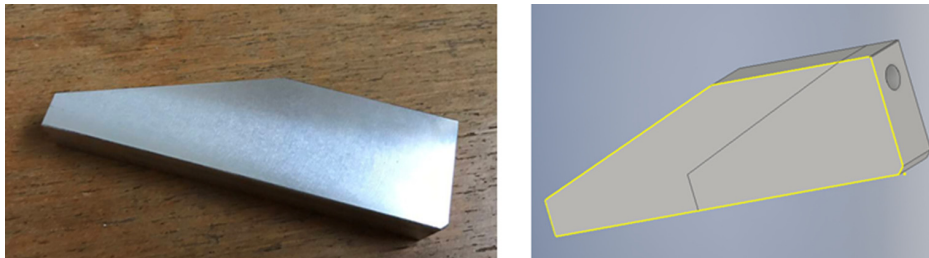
Produced component (left) and built 3D model (right) – EN AW-AlZn5.5MgCu
